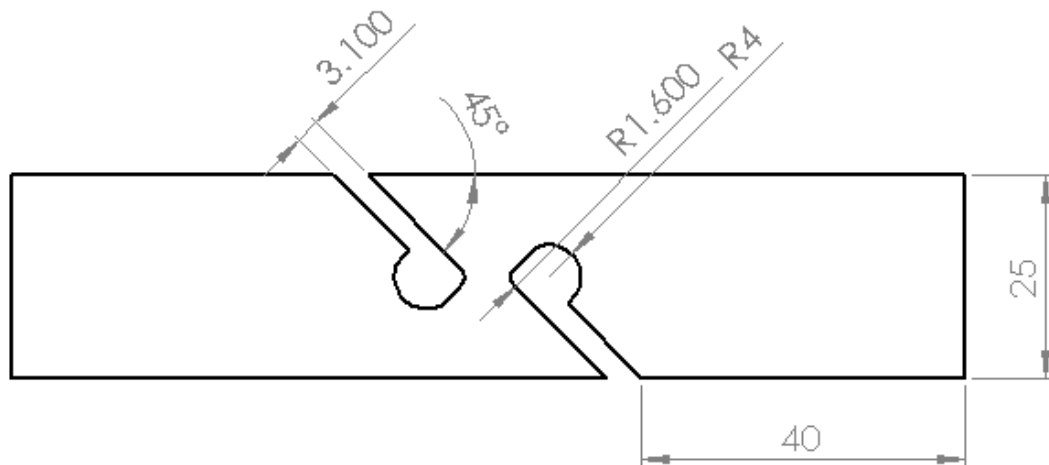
Technical drawing of modified Arcan specimen for quasi-static shear fracture
